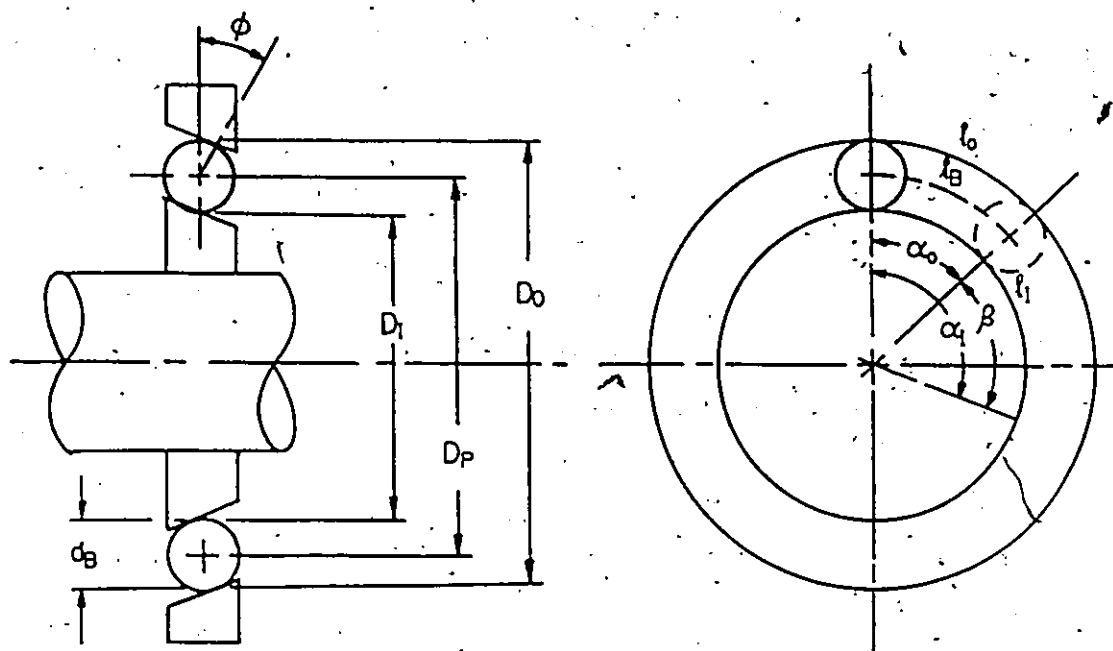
A TYPICAL BEARING GEOMETRY
